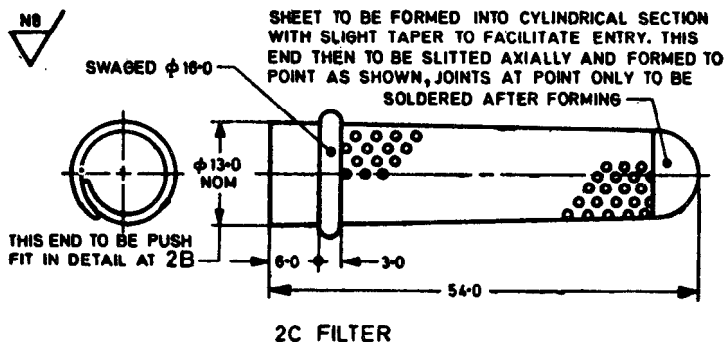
DETAIL OF SHOWER HEAD PARTS — Continued
